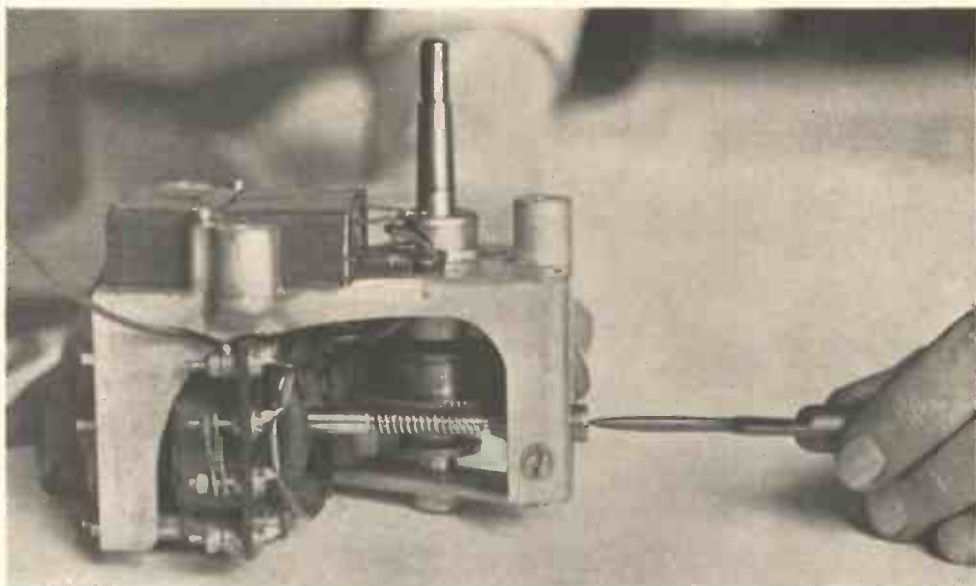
ADJUSTING THE ROTOR SPINDLE BEARING.
